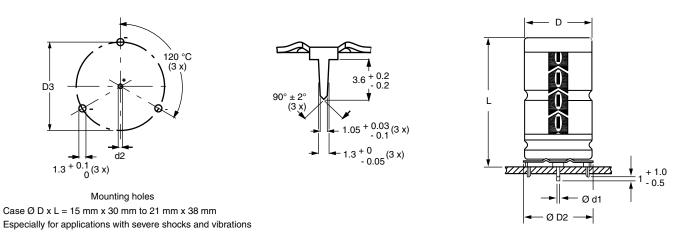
Mounting hole diagram and outline; Form MR: With mounting ring and pins
